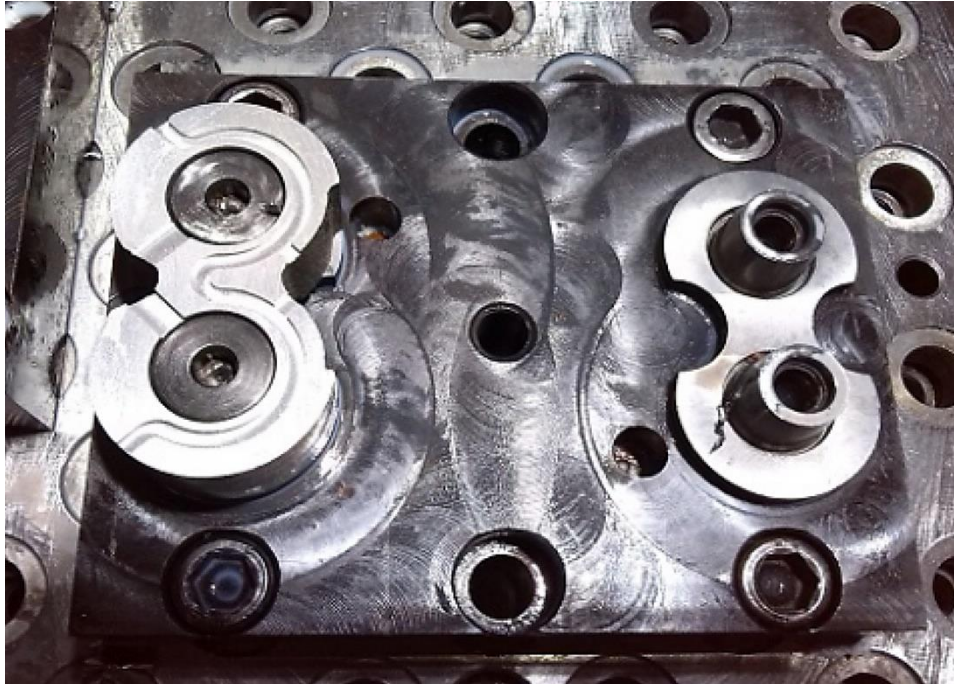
Mounting of plain bearing housing on CNC machine table - detail of bearing housing assembly.
